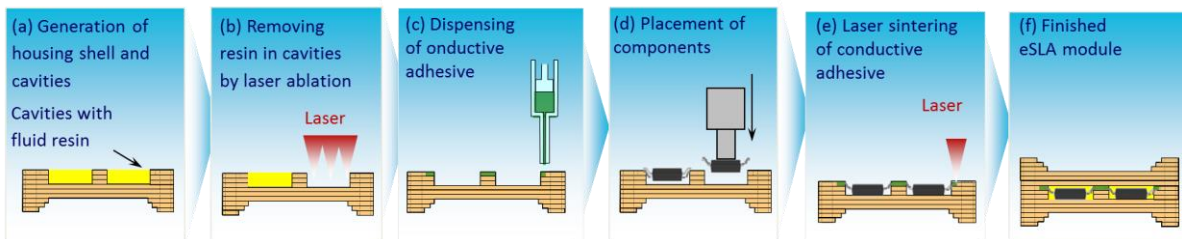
(a) Generation of housing shell; (b) Removing of resin residues by laser ablation; (c) Dispensing of silver ink; (d) Placement of components; (e) Laser sintering; (f) Continuing of the process and finishing
